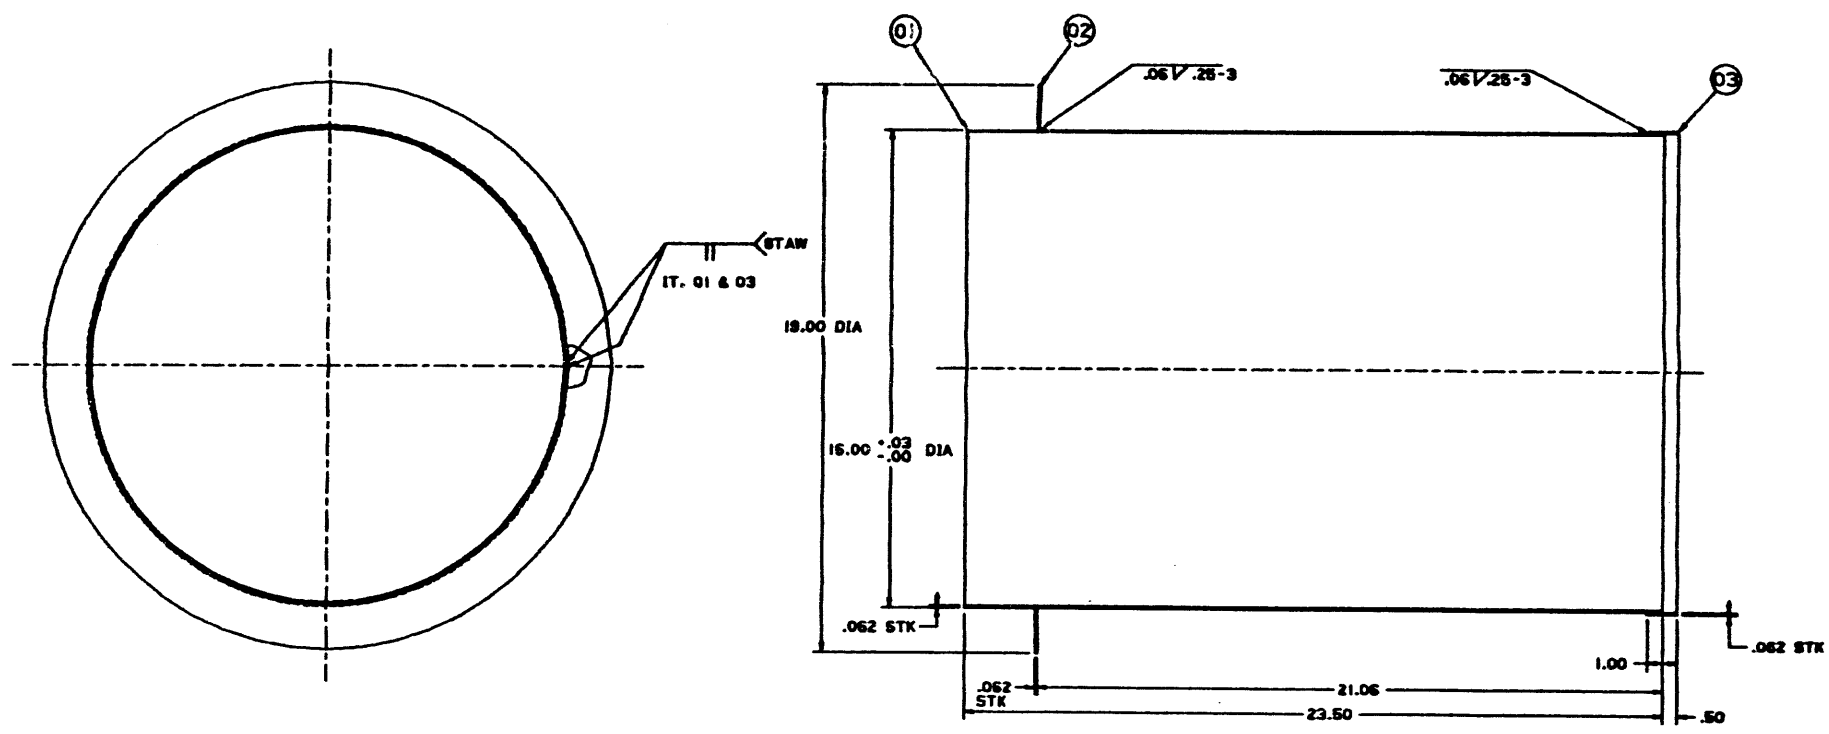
Modified PFBC Simulator Top Half Liner Weld
